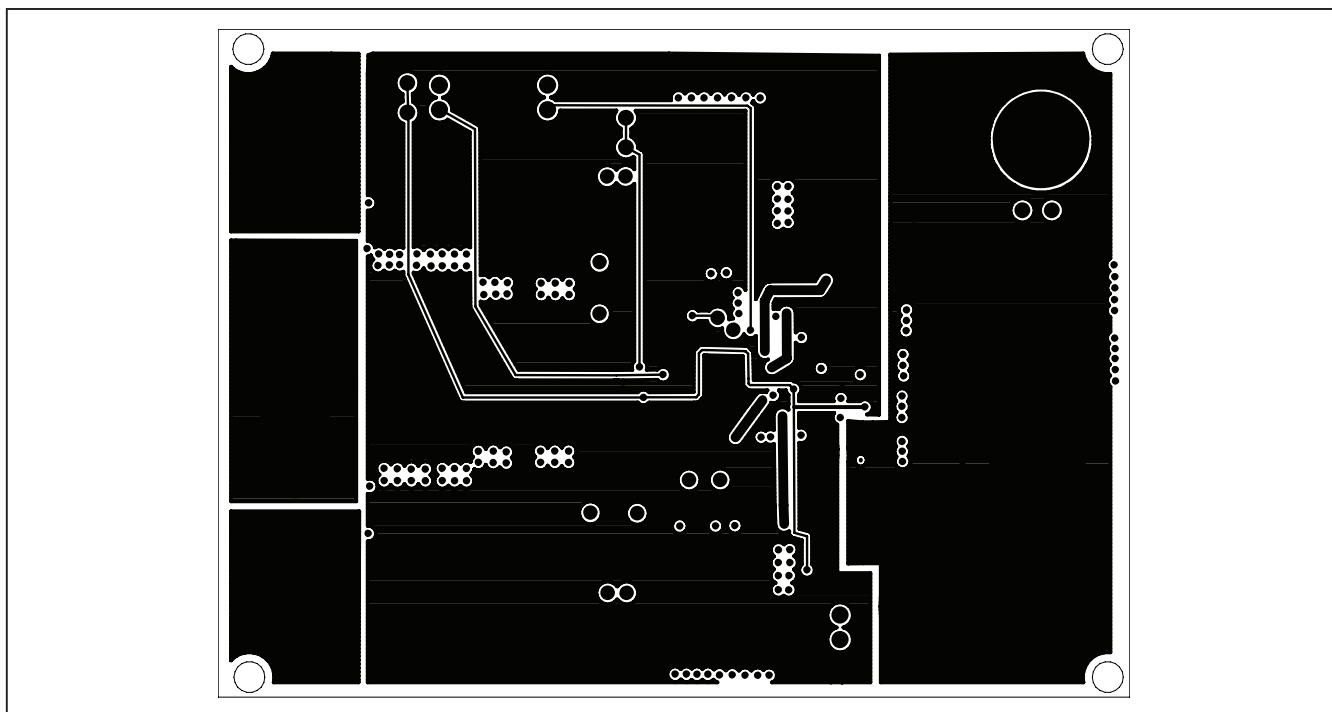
MAX15034B EV Kit PCB Layout—Internal Layer 3—AGND Layer
